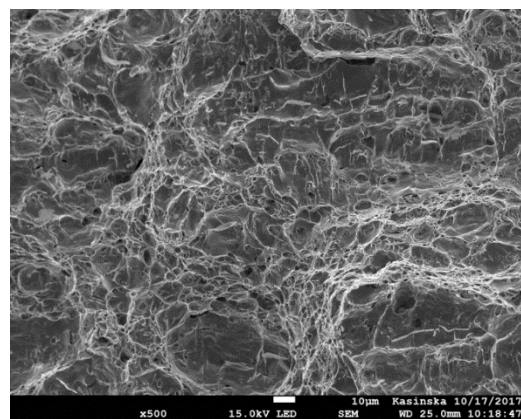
Dimples along the fracture surface in specimen PN; material N, temp. +20°C
